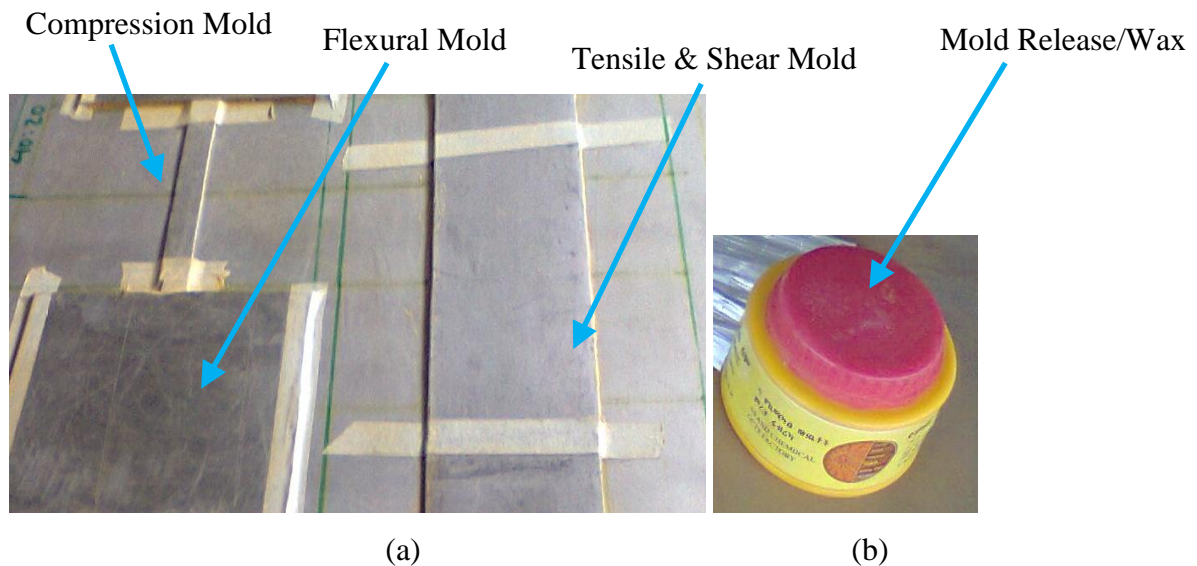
Materials used for vacuum bagging (a) Vacuum Bag Mold
